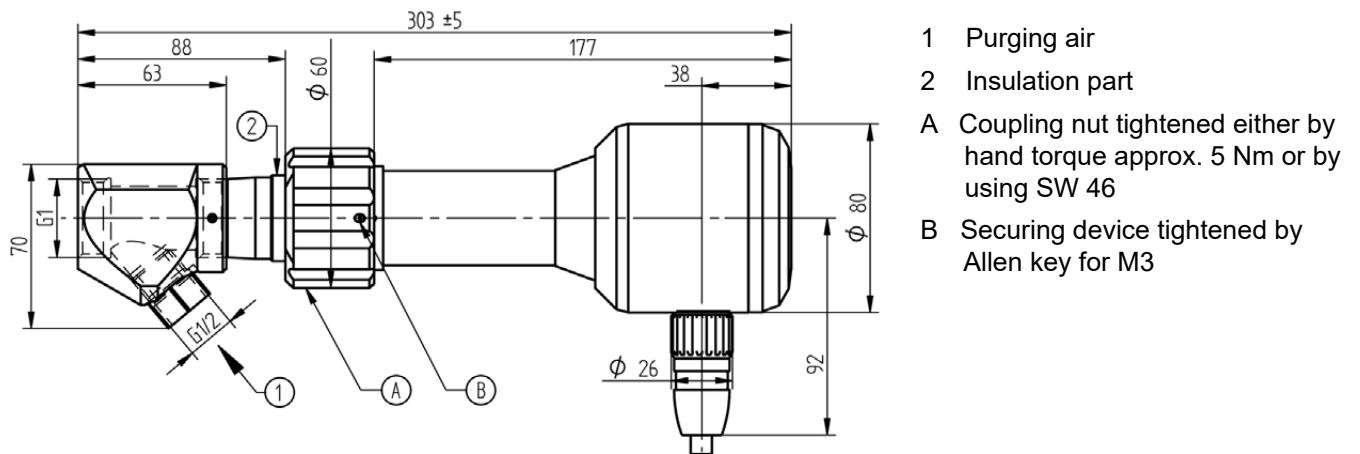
Dimensional drawing FV30-10 Type 659S1200 with flame scanner F200K
